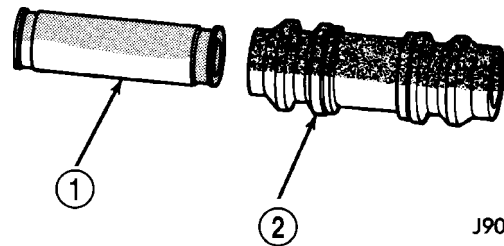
MOUNTING BOLT BUSHING AND BOOT - TYPICAL
